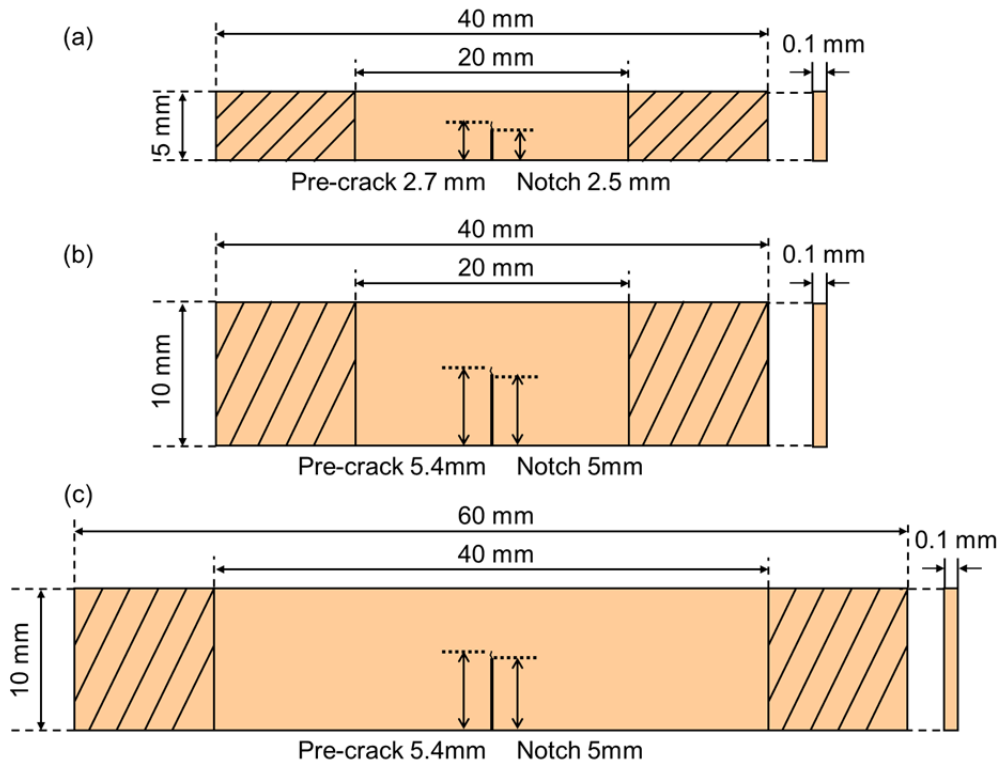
Specimen geometry. (a) Standard type, (b) High-cycle type, (c) High-sensitive type.
